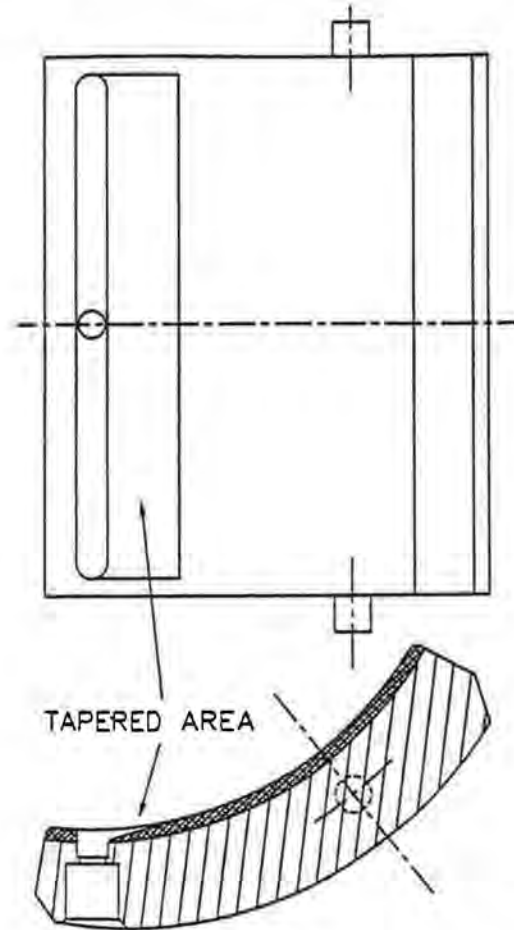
Sectional View Illustrating Tapered Modification to Leading Edge Groove
